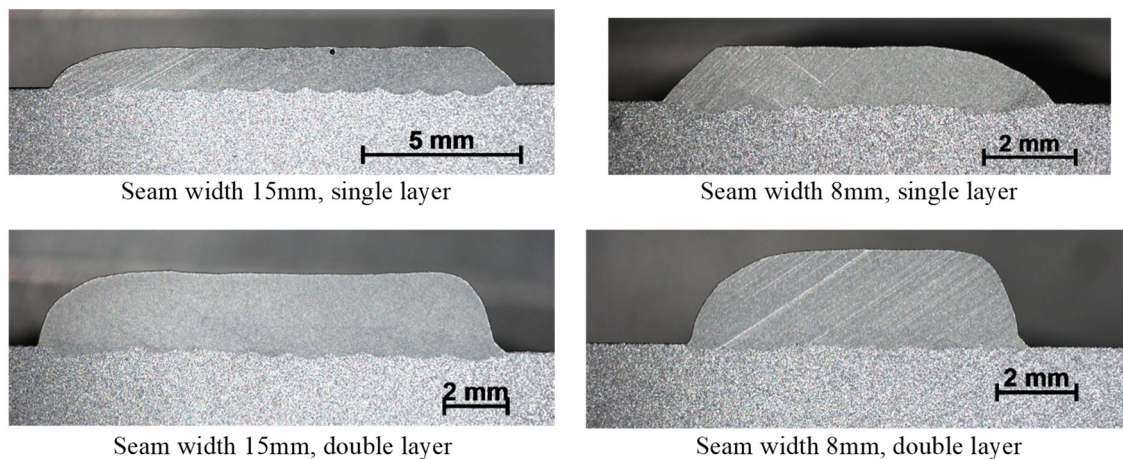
Examples of the seam geometry after deposition welding.
